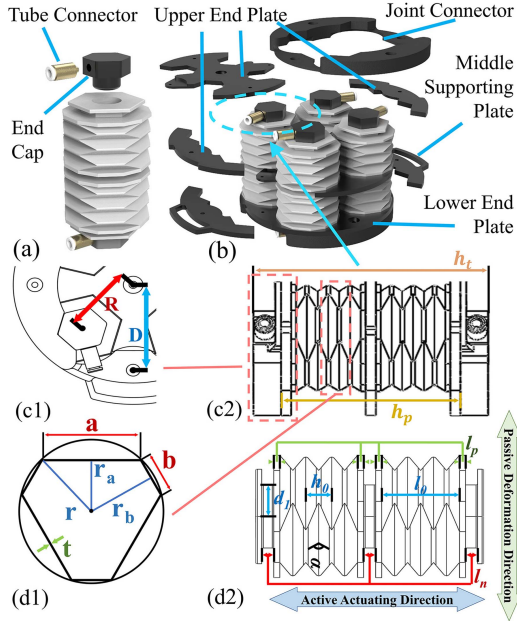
Exploded drawing of the DSHO actuator (a), and the PBOC joint (b). (c1) The top view, and the side view (c2) of the PBOC joint. The top view (d1), and the side view (d2) of the DSHO actuator.
